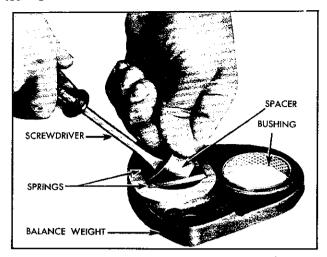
Installing Spring Spacer in Spring Packs— Six Cylinder.
